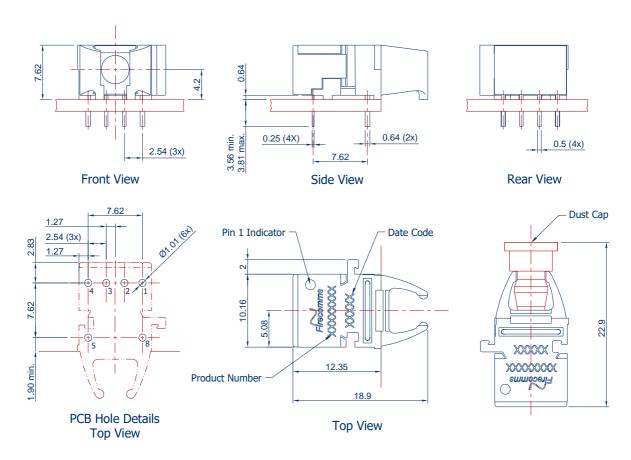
Mechanical dimensions of RedLink® horizontal connectors and PCB footprint, which is a top view General dimensional tolerance is \pm 0.2 mm
